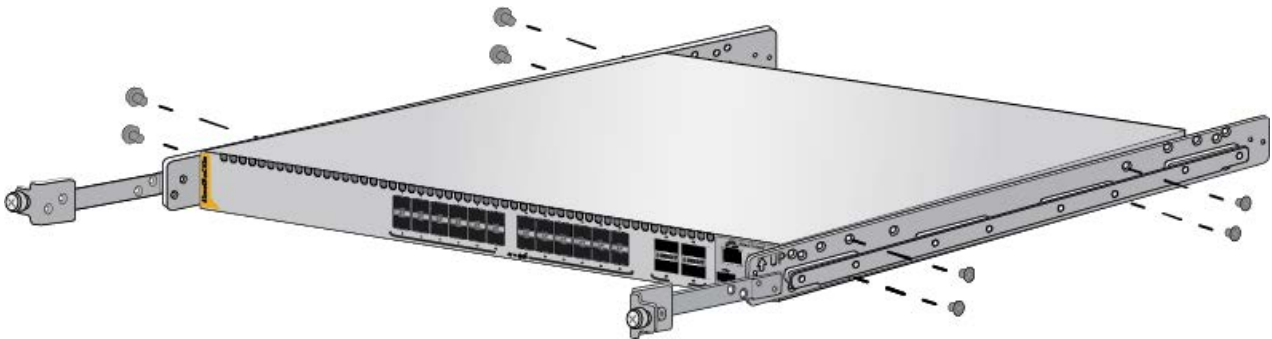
Attaching the Inner Rails to the x530DP-28GHXm Switch
